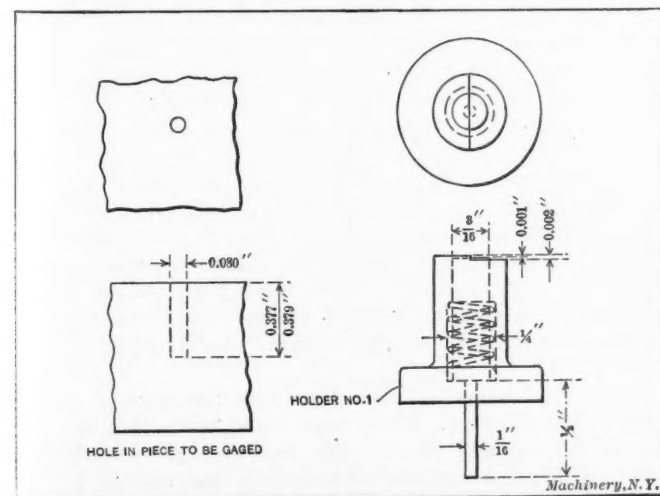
Flush-pin Gage for Gaging Small and Deep Holes
